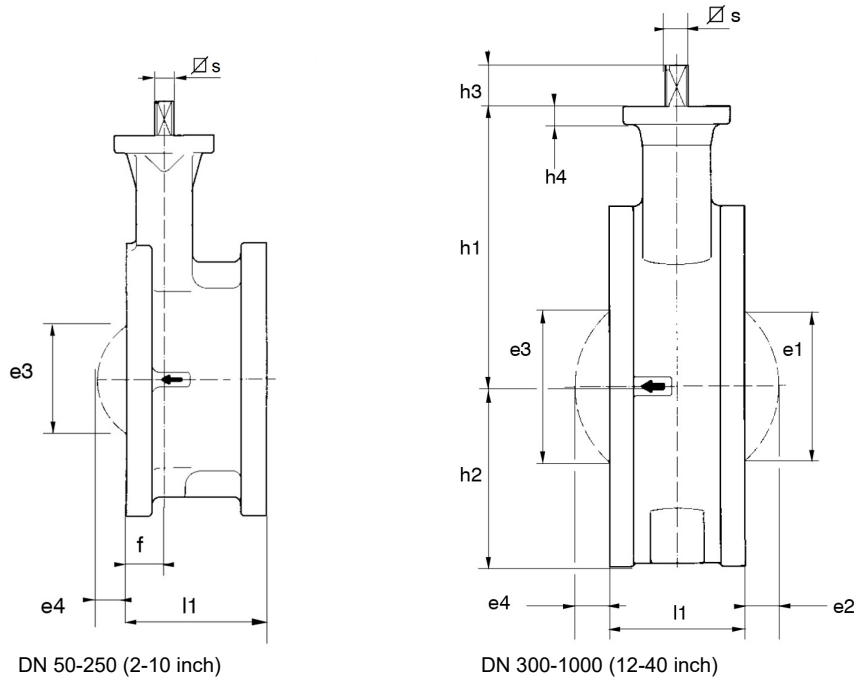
Sectional drawing of TRIODIS 150 MT - T7
